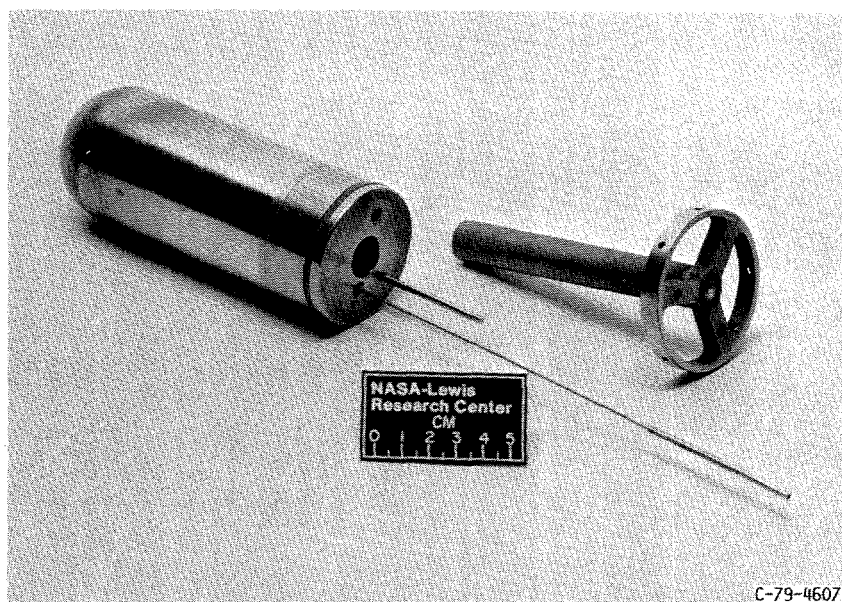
DISPLACER AND DISPLACER ROD 1.
